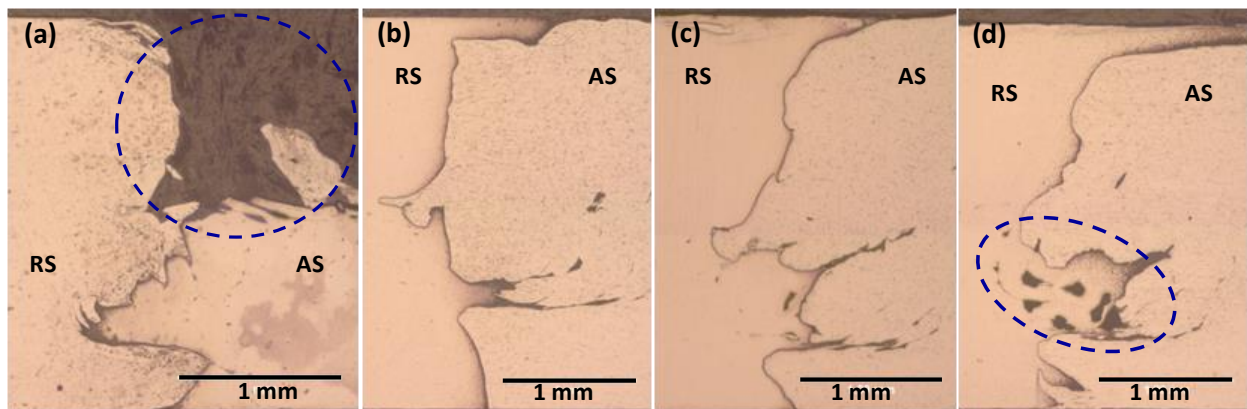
Optical microscope observation of the cross section of the welded joint obtained using parameters (a) 1600 rpm rotational and 250 mm/min translational speeds (Al on the RS).
